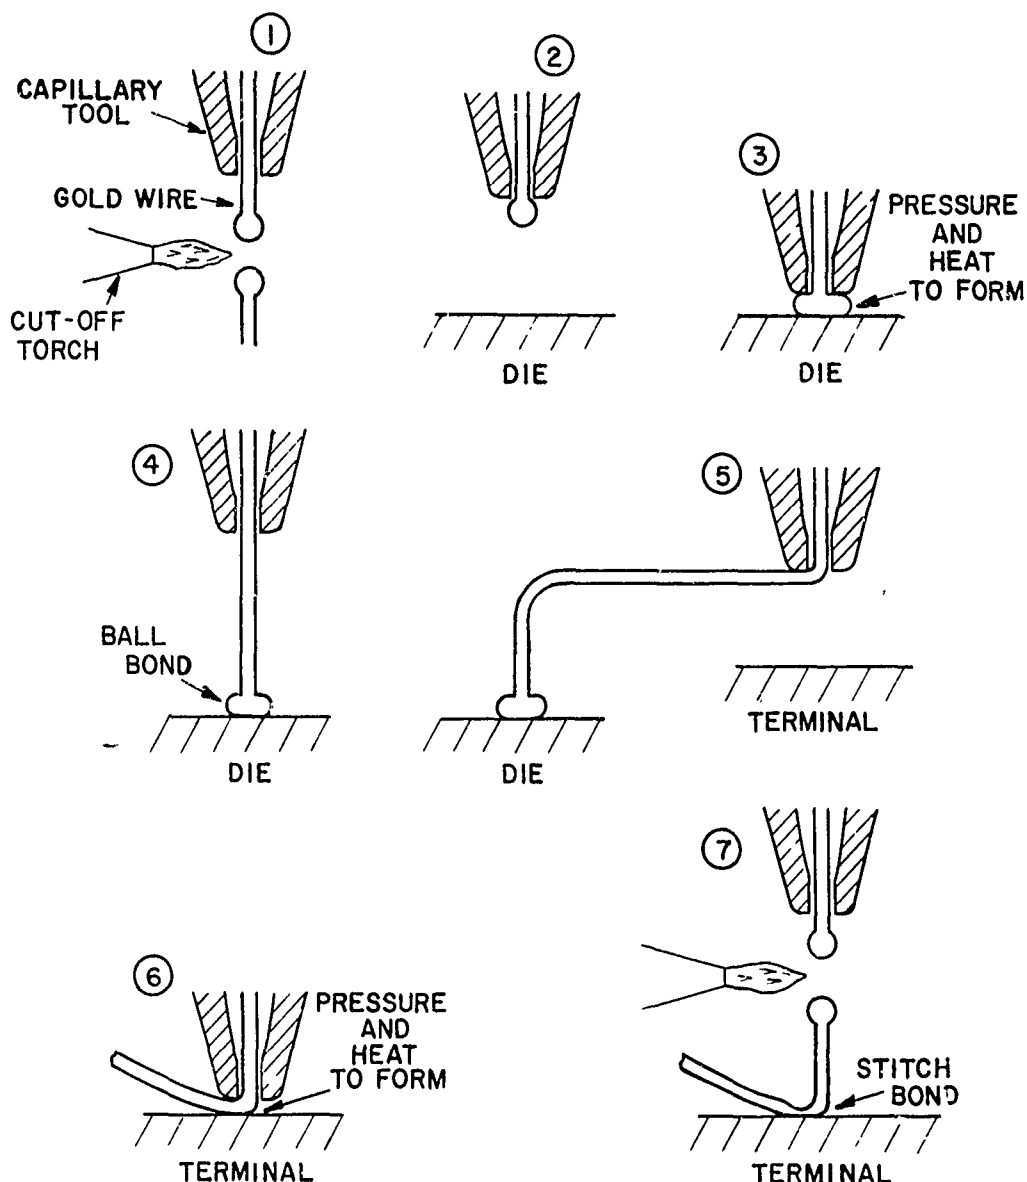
Procedure for making a ball-stitch wire bond: (1) Gold wire is fed thru the capillary type bonding tool; a small flame is passed across the wire below the bottom of the capillary to melt the wire and, by surface tension, form a gold ball at the end of the wire. (2) The wire is retracted so that the ball is held against the bottom of the capillary tool. (3) The tool is lowered to the contacting surface where the gold ball is pressed against the contacting surface and the interface is brought to the bonding temperature to form a bond. (4) The tool is raised with the wire bonded to the surface. (5) The bonding surface on the terminal is positioned beneath the bonding tool. (6) The tool is lowered as in step 3 to make a bond. This bond and any subsequent bonds made before the wire is cut again are called stitch bonds. (7) After the last stitch bond is made, the capillary tool is raised as the wire is paid out and a flame is moved across the wire to sever it and form a ball on each end of the wire.—The bonder is then ready for the next bonding cycle and to make another ball bond. The upright wire extending from the stitch bond is removed by manually pulling the wire. The wire will rupture adjacent to the stitch bond because of the reduced wire cross-section there. Grable and Patzer [69G2] have described a technique for avoiding this separate procedure. After making the last stitch bond the capillary is raised slightly and a wire clamp is activated and pulled backward to rupture the wire. The capillary is then raised and a flame swept across the wire end to form a ball in preparation for the next bonding cycle.
